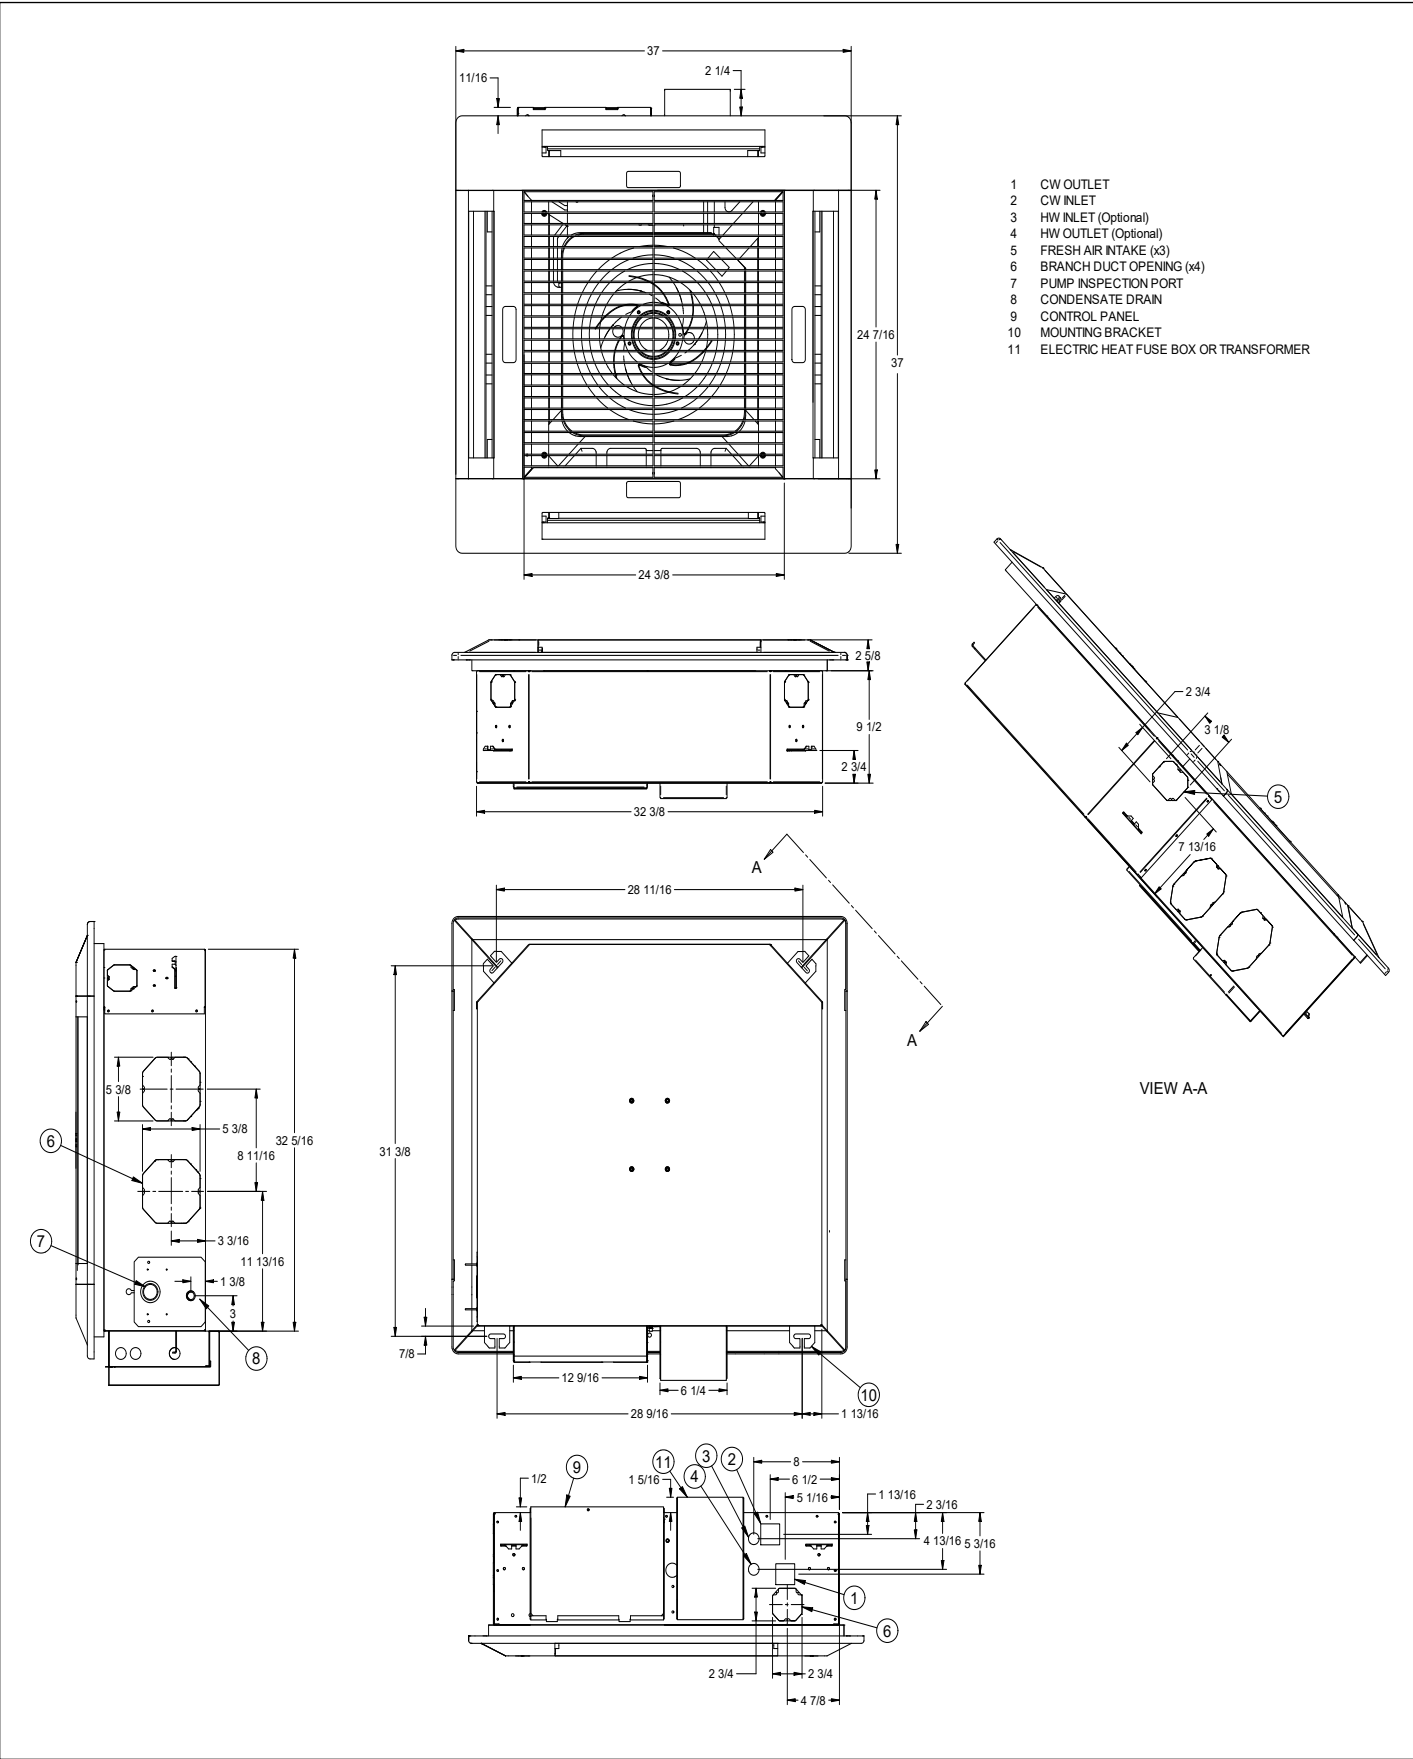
Dimensions - Large Chassis: SCW33 and SCW36 (in inches)
